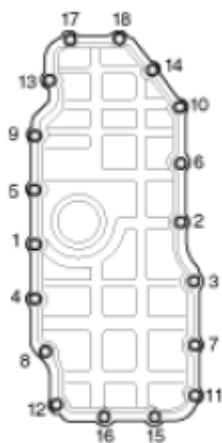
Lower Oil Pan Bolts Tightening Sequence
